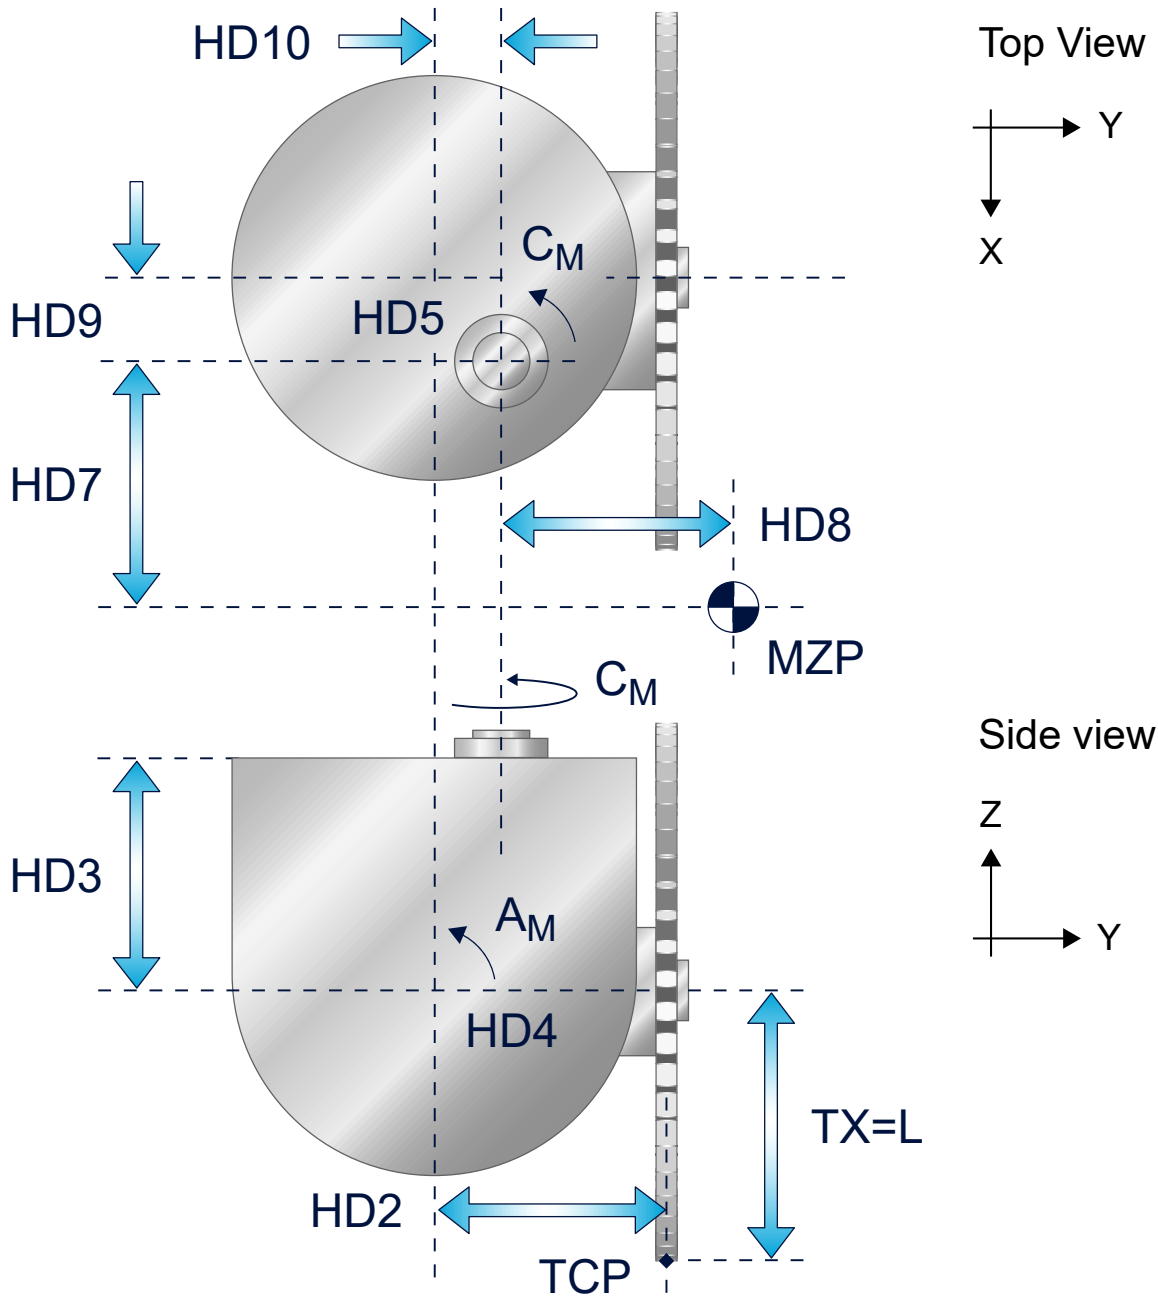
Sawing tool (zero position where  $HD5 = 0$ ,  $HD4 = +90$ )
